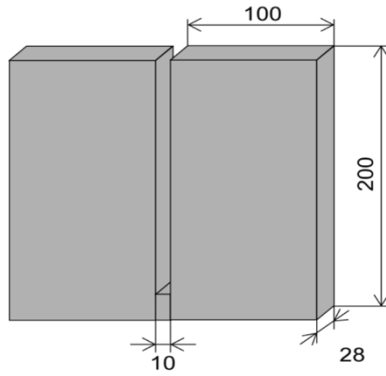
Specimen dimension and weld joint configuration
